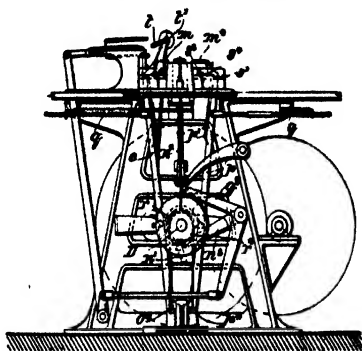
Tea Packing and Parcelling Machine (sectional side elevation of folding and discharging device).
